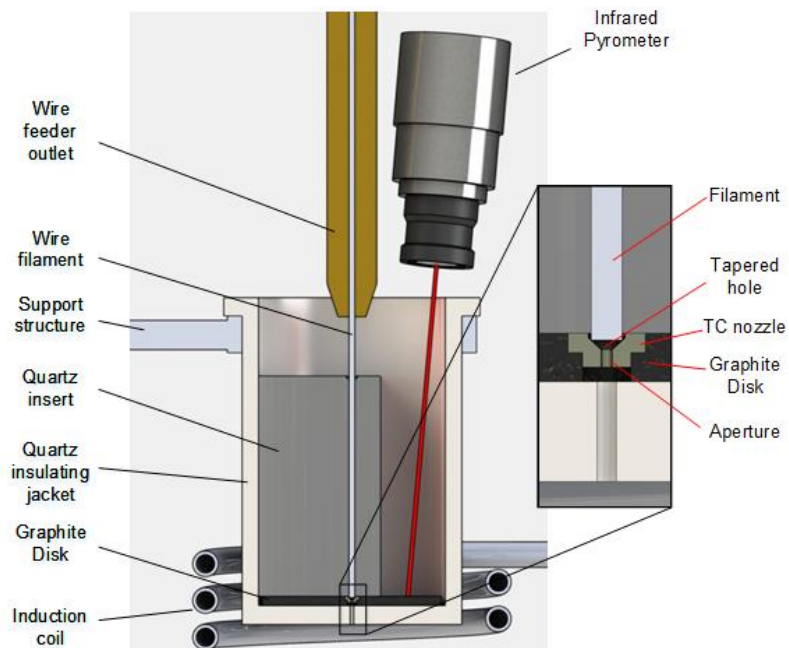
Final schematic of a printhead for a novel DoD printer. [104]
